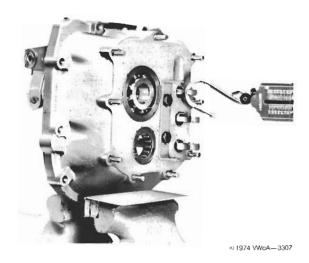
Detents being checked with a spring scale. If shaft moves too stiffly, check for bending or dirt in the bore; if it moves too easily, check the spring length. The springs should be 23 to 25 mm (2%₃₂ to 63%₆₄ in.) long.
